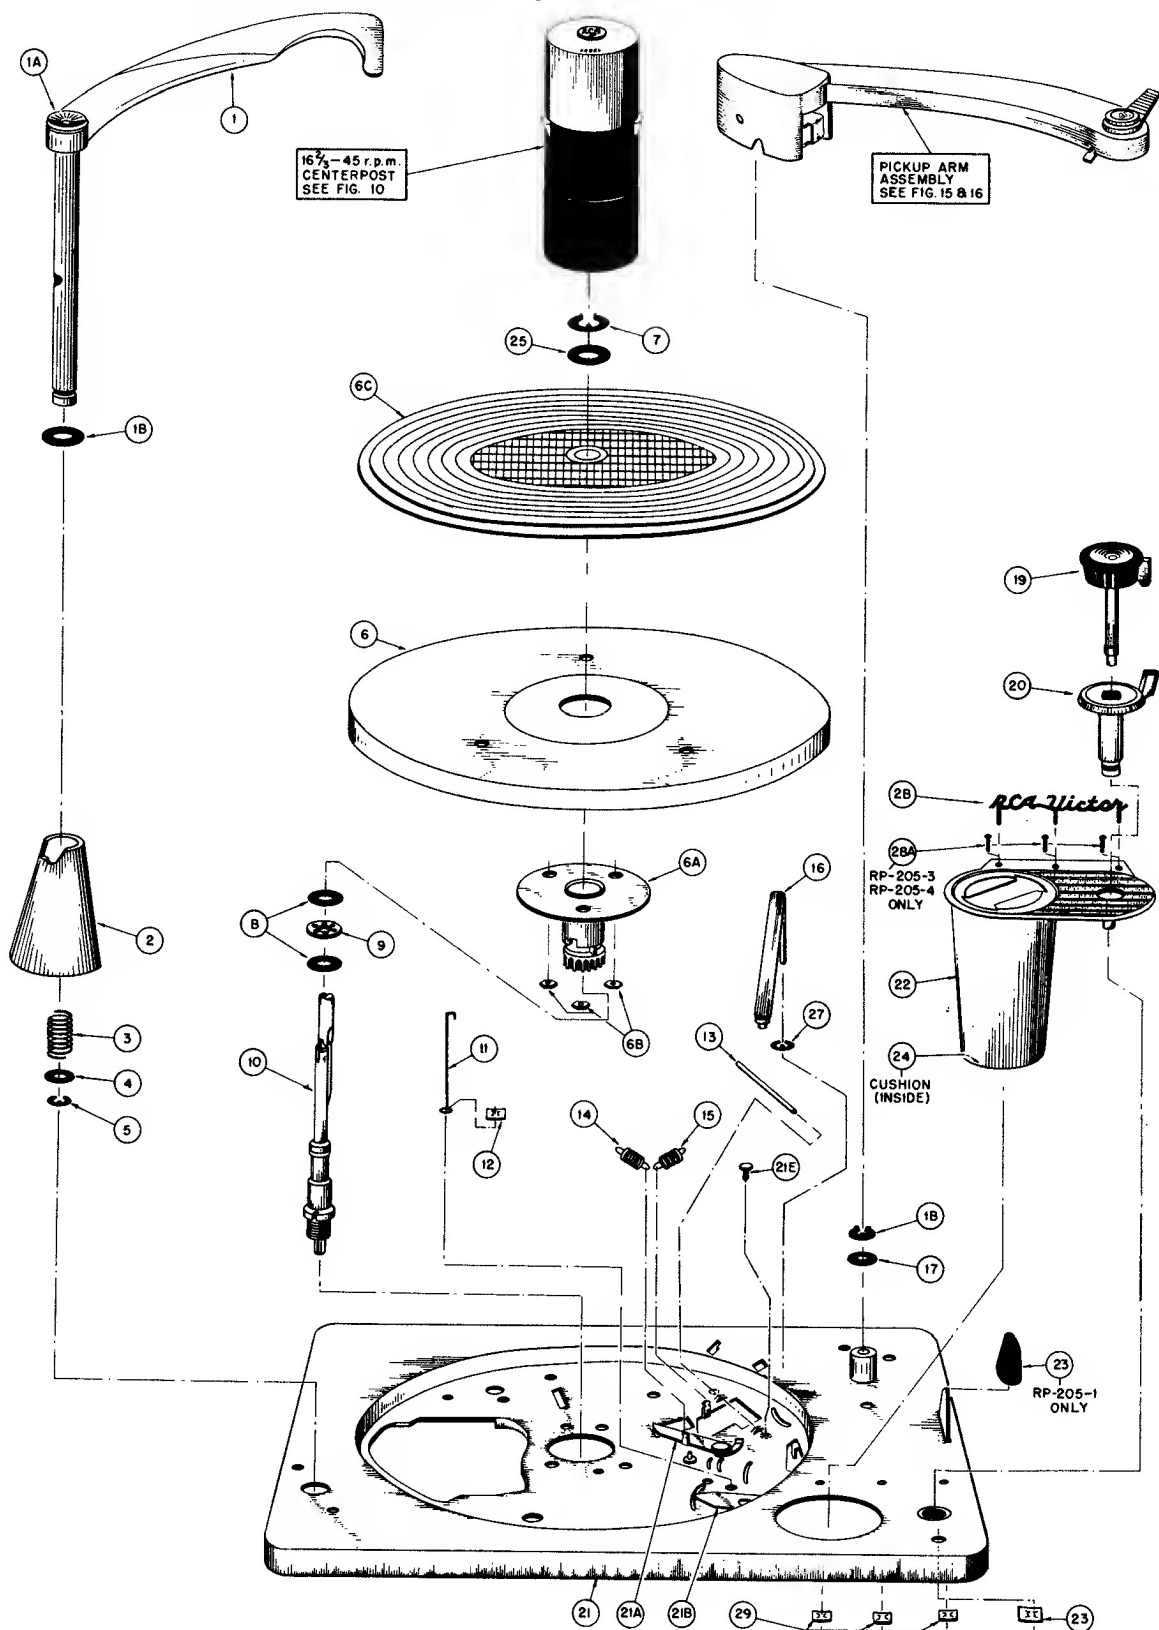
A—Exploded View Showing Mechanism Parts Above Motor Board
